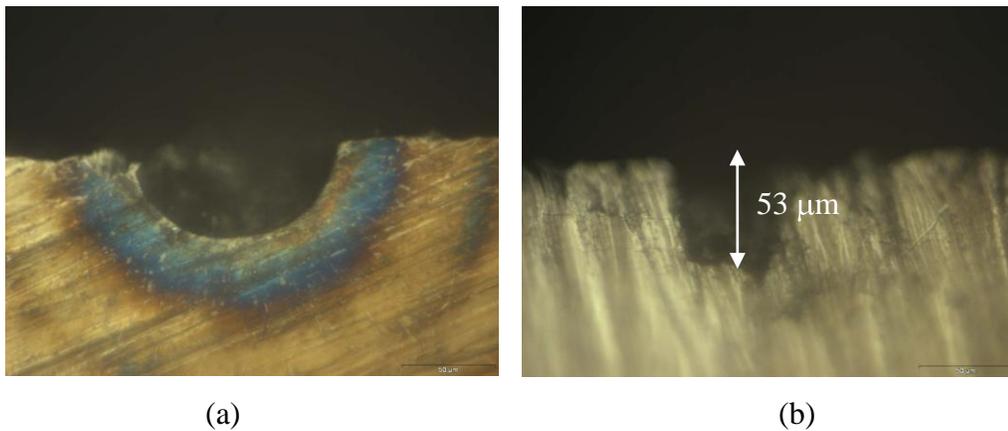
Images of the drilled hole confirming depth. (a) Top view; (b) Cross-section view
